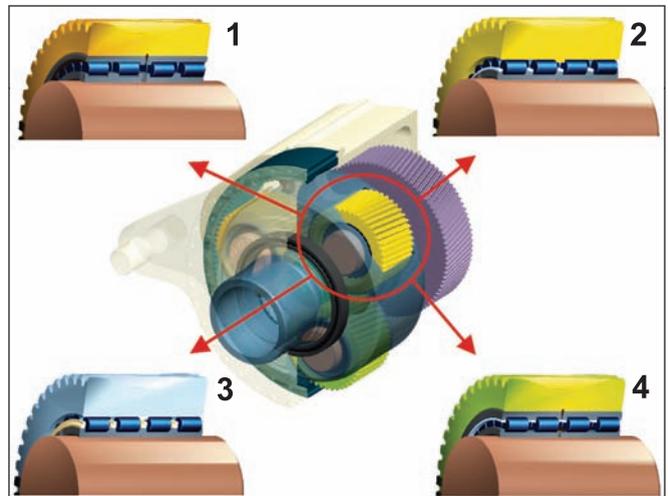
(1) Full-complement bearing; (2) HCCRB version JB; (3) standard CRB with brass cage; (4) HCCRB version JA.
